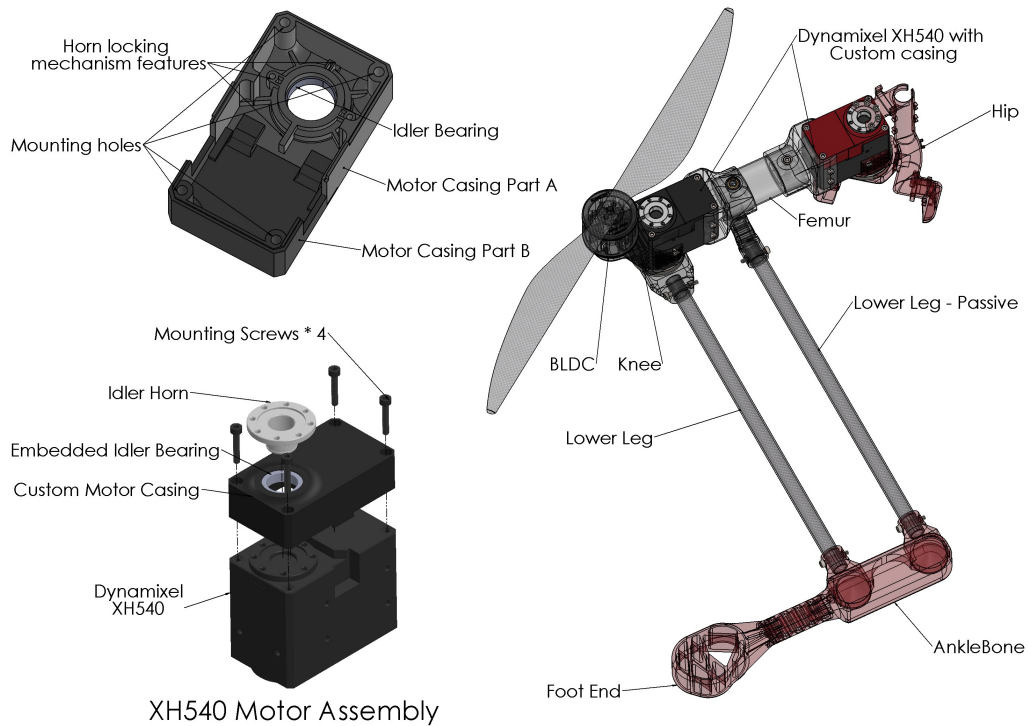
left bottom shows the exploded view of the XH540 motor assembly, left top figure represents the motor casing with embedded bearing, and right figure is a reference for the locations of this motor assembly.
